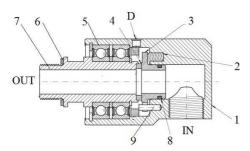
Rotary couplings: 1 – body, 2 – pressing springs, 3 – movable ceramic bushing, 4 – sealing ceramic ring, 5 – bearings, 6 – sealing washer, 7 – fitting outlet, 8 – mobile sealing element, 9 – guiding elements, *IN* – supply, *D* – drain circuit, *OUT* – fitting outlet.
